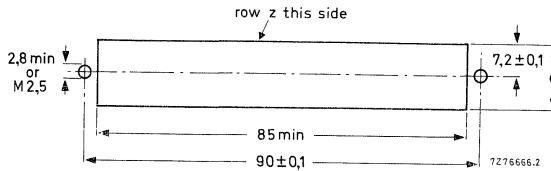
Panel cut-out; see Table 4 for dimension a.
